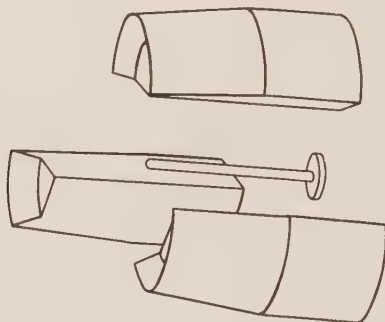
Die for preparing pellets $\frac{1}{8}$ in. in diameter in a briquetting machine.
